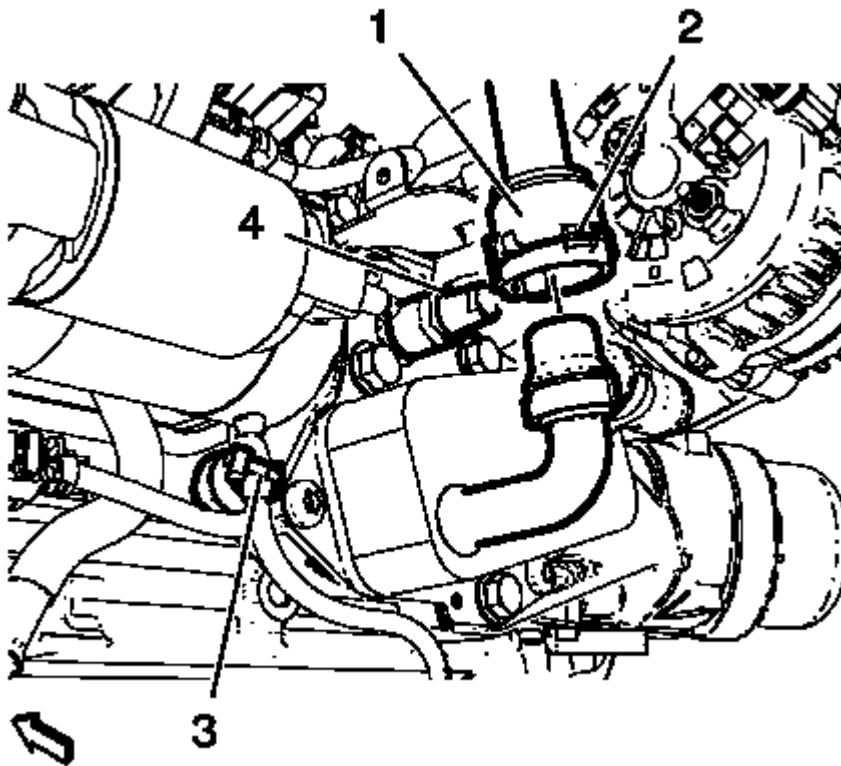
Oil Filter Adapter And Oil Cooler Assembly Bolts
